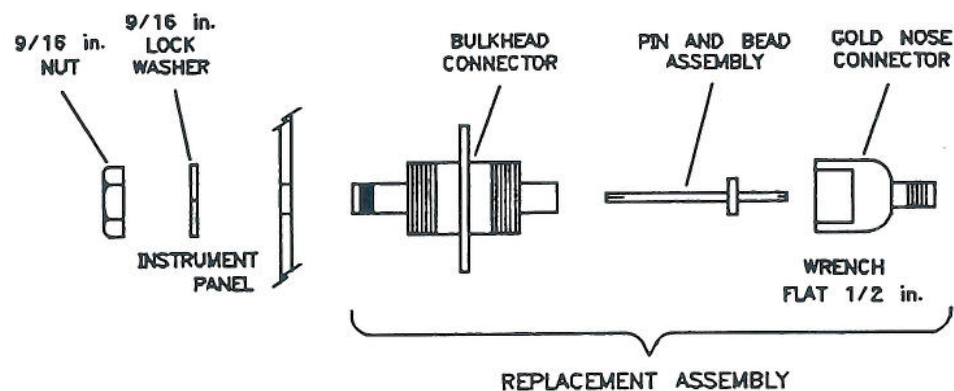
Exploded Diagram of 2.4 mm Connector
